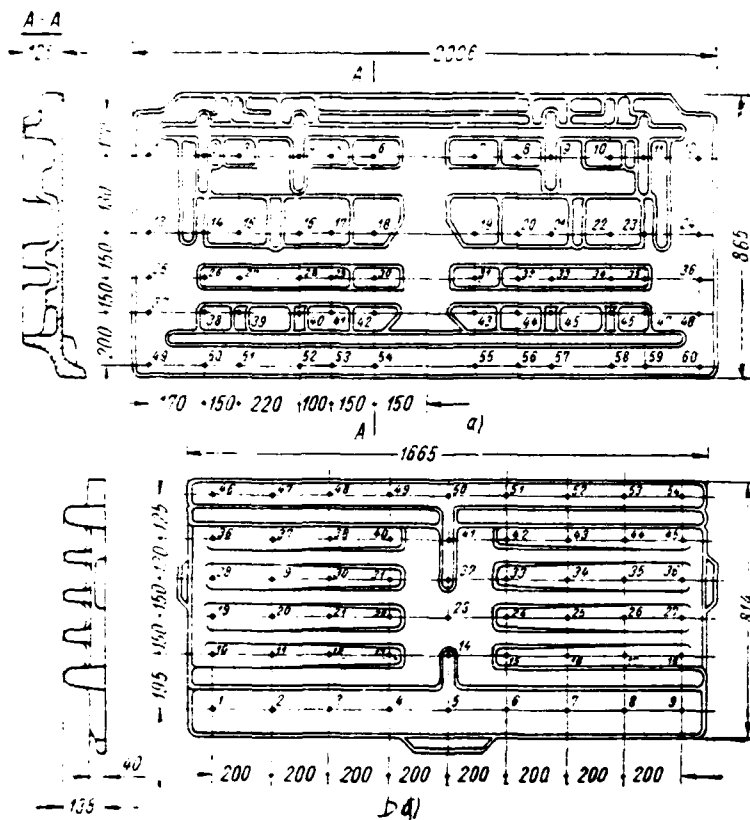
Die-forged forgings of pannels by the size/dimensicn: a) 2000x850 mm; b) 1670x800 mm.
